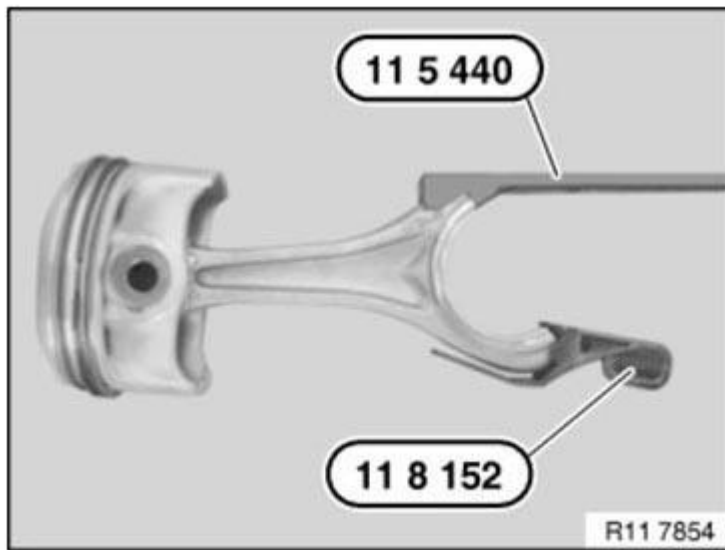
Inserting Special Tools 11 8 151 And 11 8 152 Into Conrod
